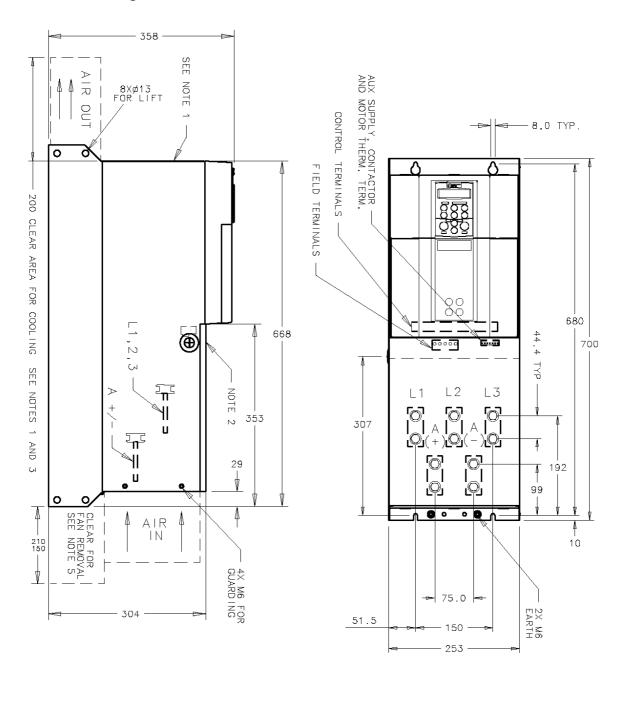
Frame 3: 270A Stack Assembly - Drg No. HG466428
